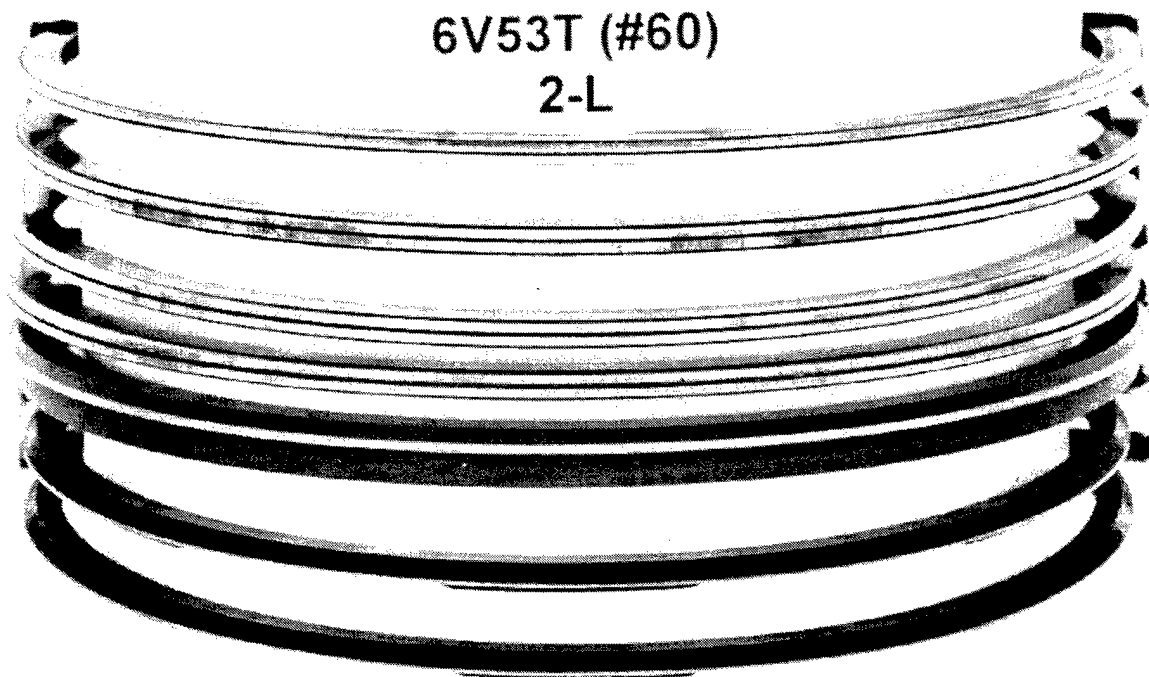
6V53T Test 60, Cylinder 2-L, Rings
